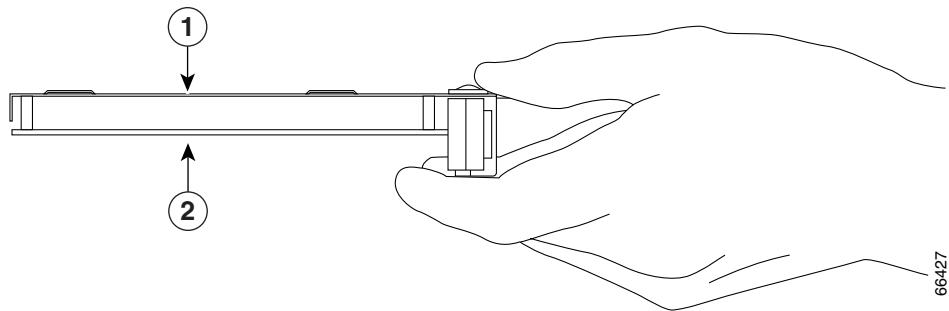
shows the location of a printed circuit board in a network processing engine or network services engine, I/O controller, or Cisco uBR7200 series cable interface line card metal carrier. Do not touch the printed circuit board when handling any of the components.
